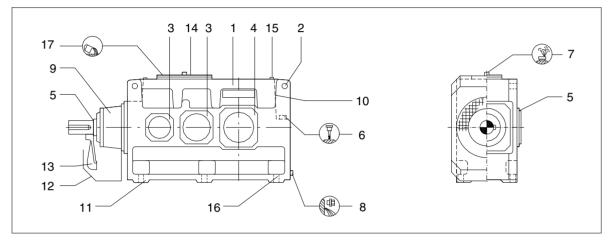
Gear-unit features on gear units type $B.H \ge 13$
